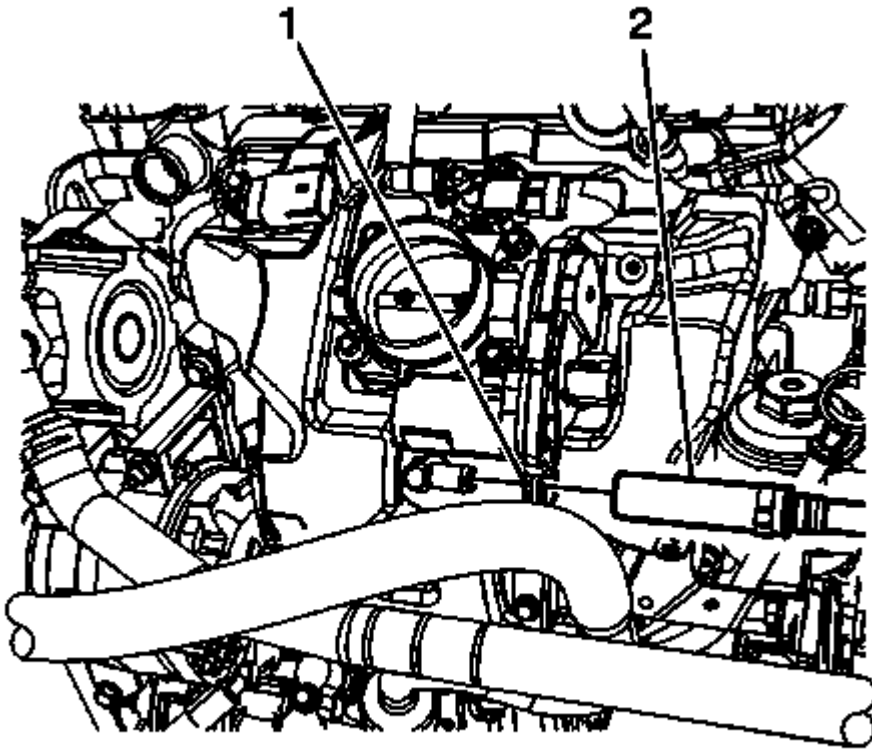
Power Brake Booster Vacuum Pipe And Clamp
